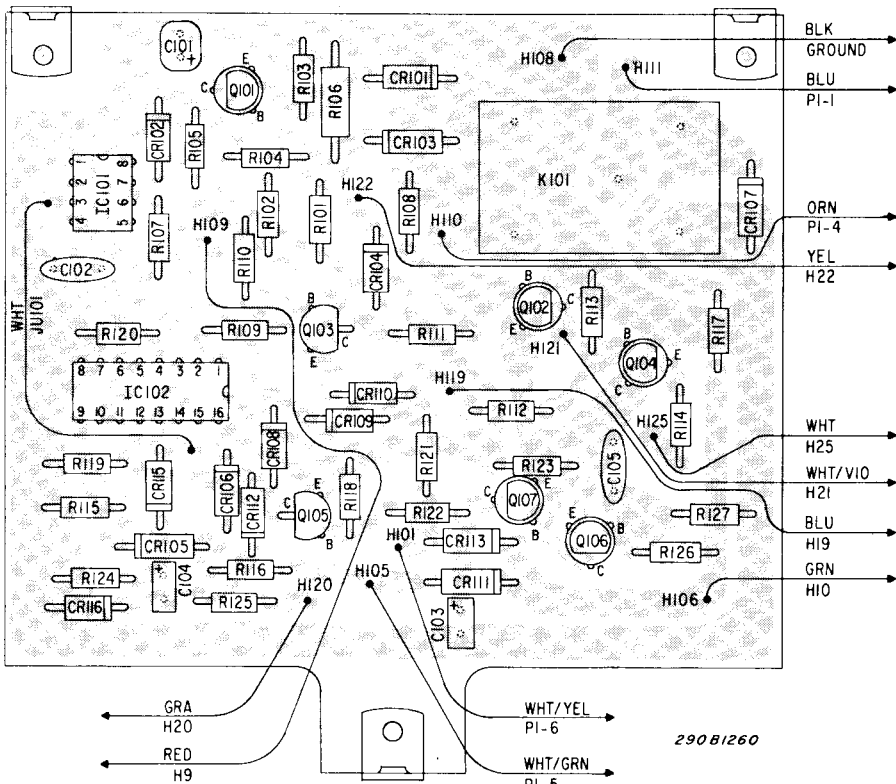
Auxiliary Circuit Board Parts Location Diagram.
